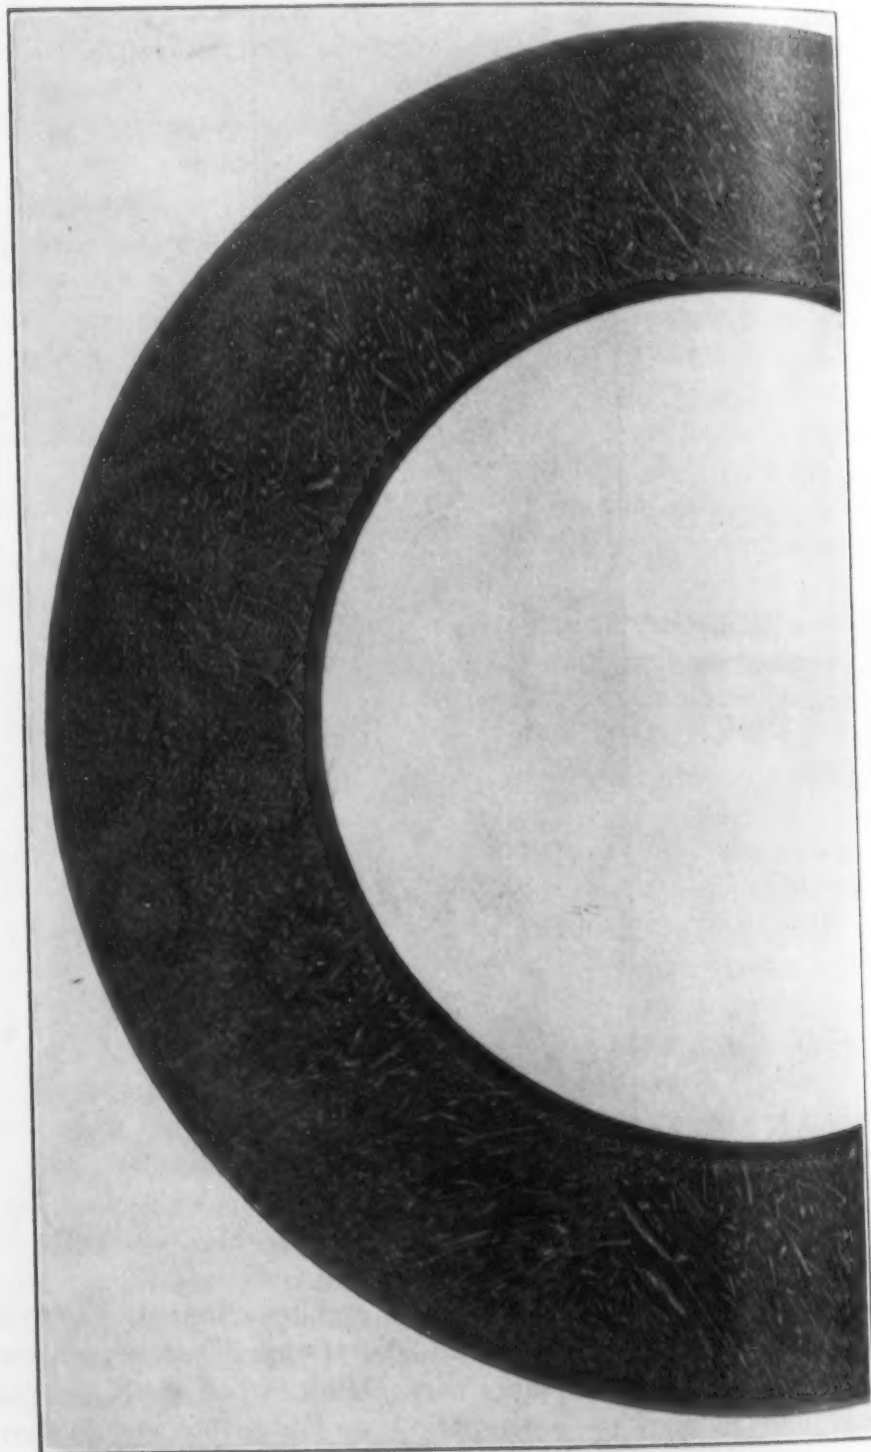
Drawing Die Made from Dendritic Carbon Tool Steel After Etch Test. Diameter of Bar 8 Inches. Diameter of Die 7.5 Inches. Carbon 0.91 Per Cent, Manganese 0.30 Per Cent.
